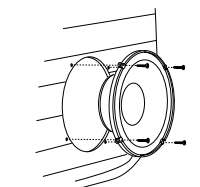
Mounting the GT0606c in a 160mm speaker location.
